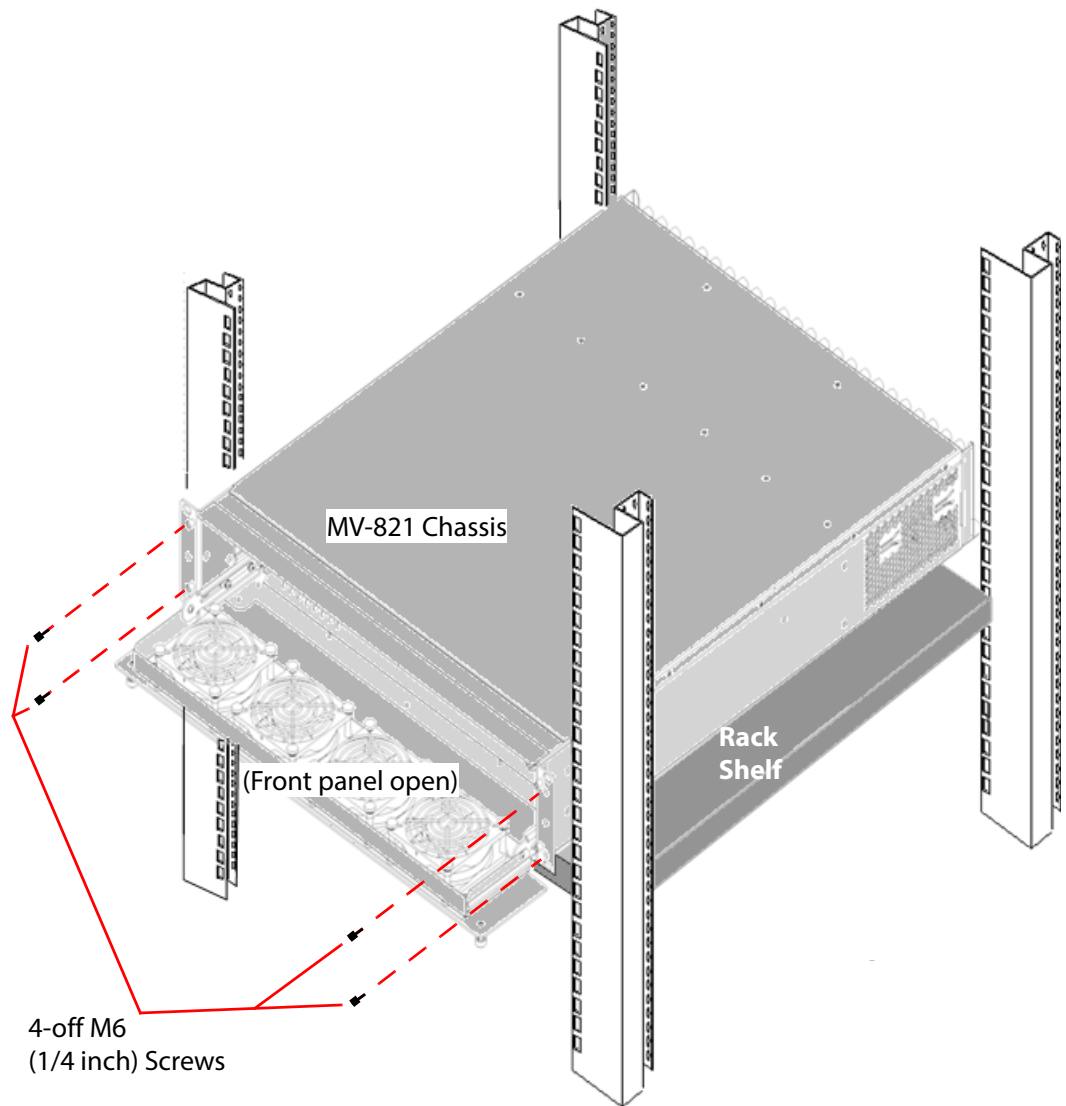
Rack Mounting MV-821 Multiviewer.
